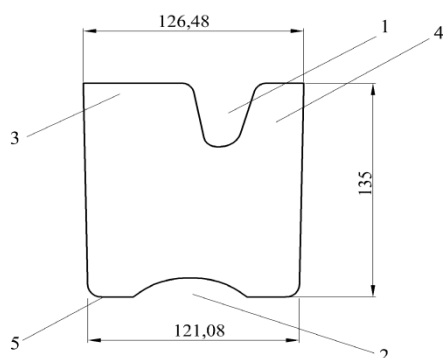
Cross section of TRNT-58 breakdown bar, being formed in rough-edged slitting pass No4. 1- groove; 2 — bottom; 3 — head; 4 — bearing rib (rubies); 5 - flanges
